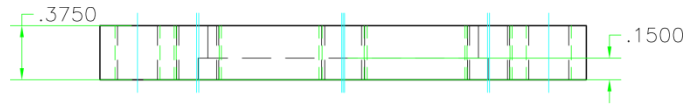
Generation 1 purifier body 3-3/8'' flange assembly.
